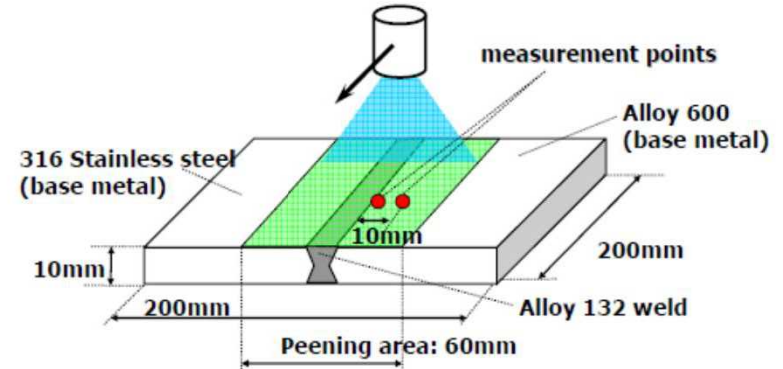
The mockup of butt weld for RV Nozzle safe-end
